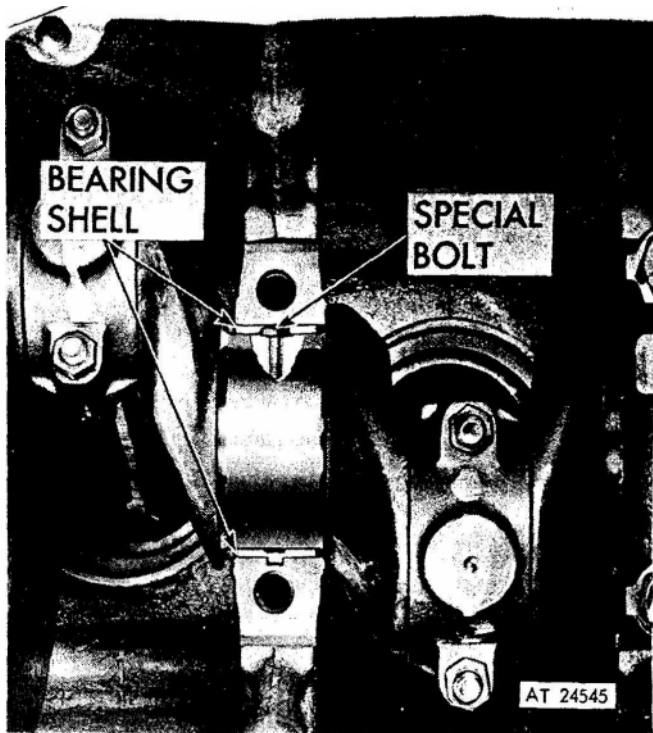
Removing main bearing upper shell (except rear main) — Crankshaft in place.
